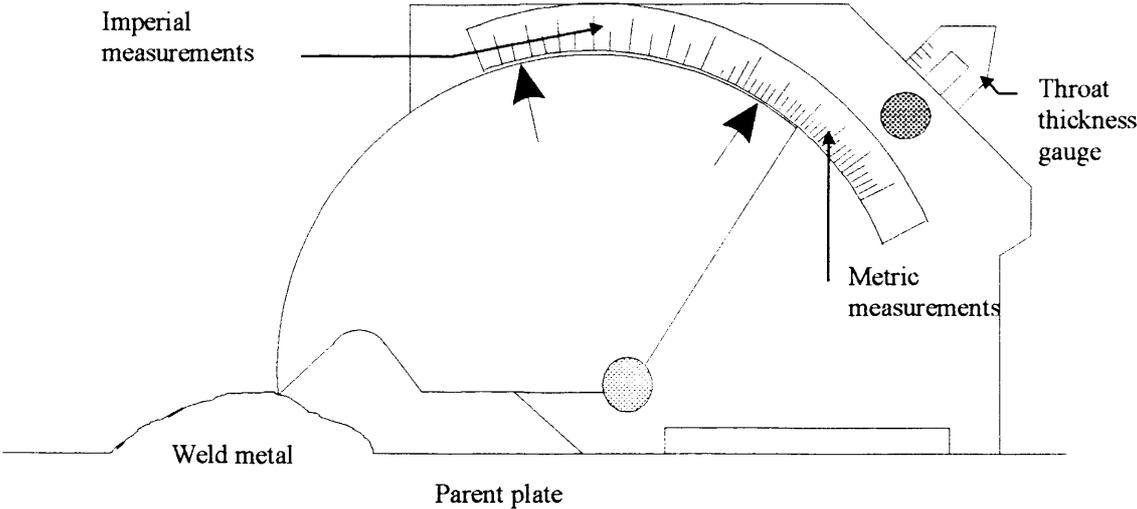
Welding Institute gauge measuring Excess weld metal
